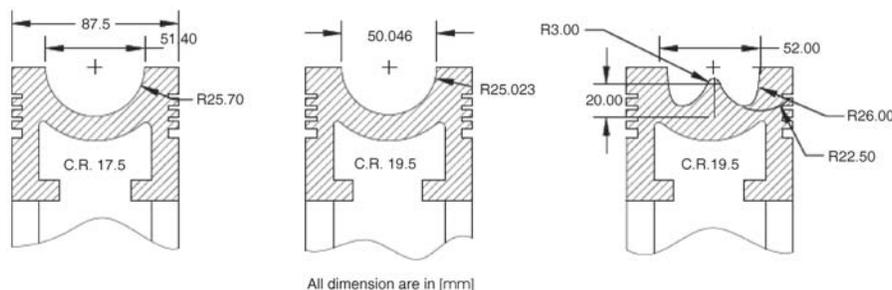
Detailed drawing of the piston bowl combustion chamber geometry
